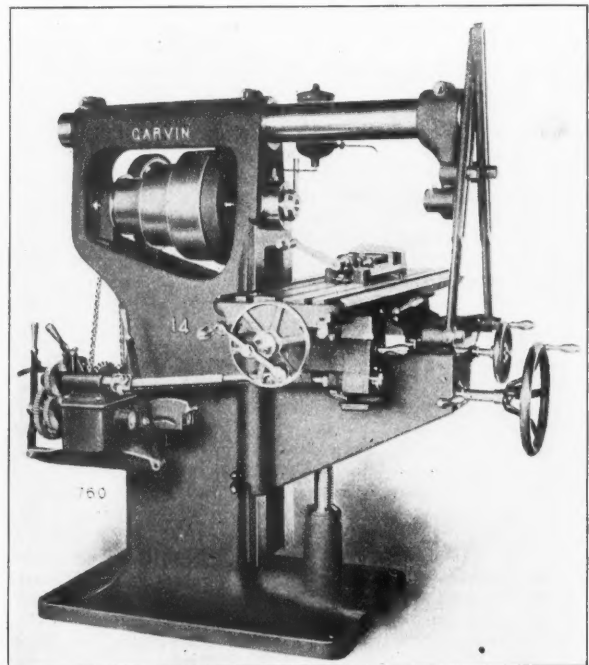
The Garvin No. 14 Plain Milling Machine.
